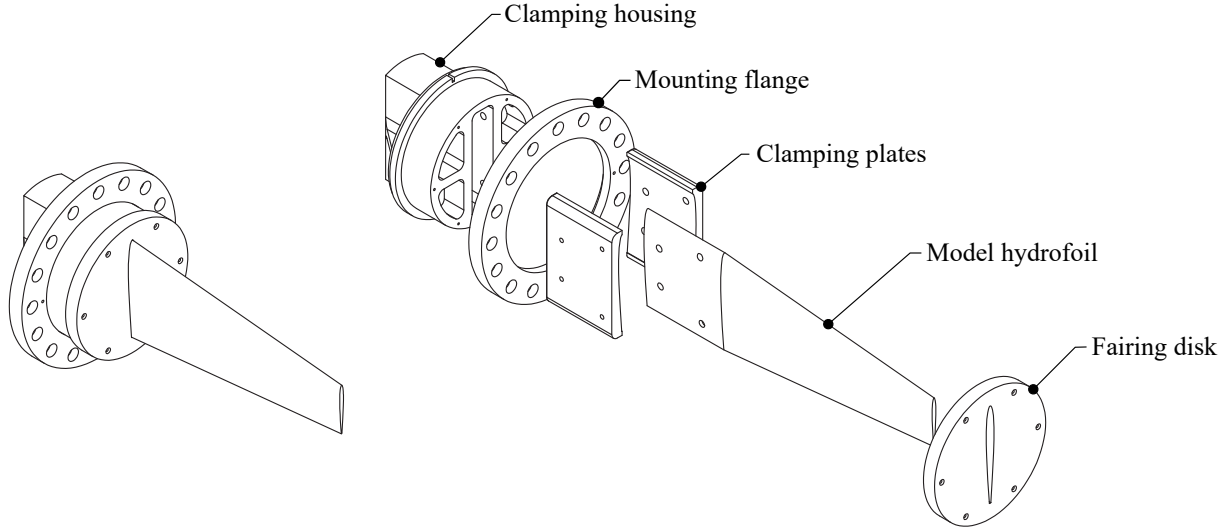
Hydrofoil model assembly showing an exploded view of the clamping housing arrangement allowing continuity of the hydrofoil.
